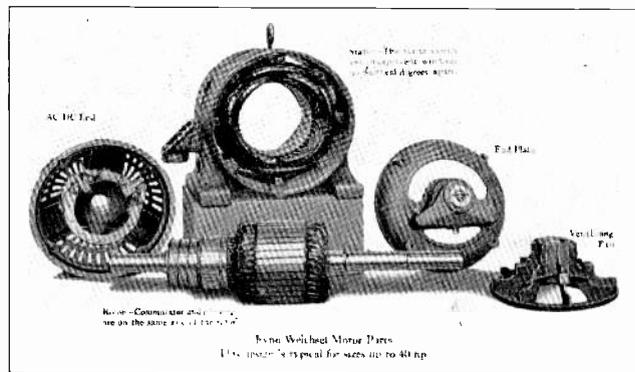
Disassembled view of Fynn-Weichsel synchronous motor. Note the commutator and slip rings both on the same end of the shaft and also the two windings in the stator. (Photo courtesy Wagner Electric Corp.)
